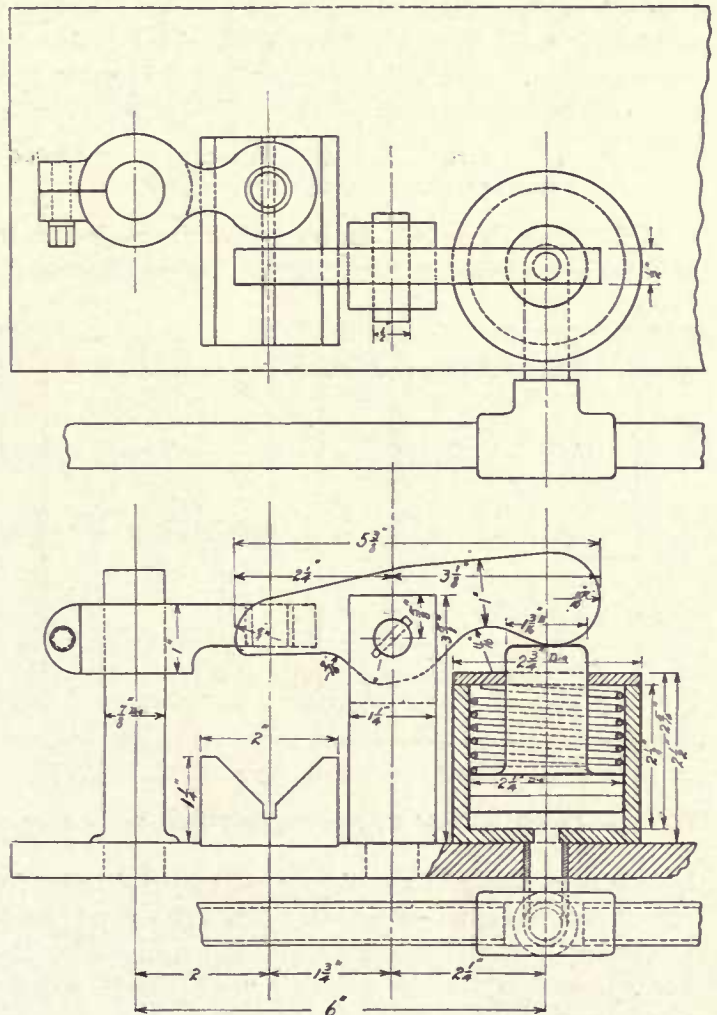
Pneumatic Clamp and Jig for Drilling Pins, Etc.
